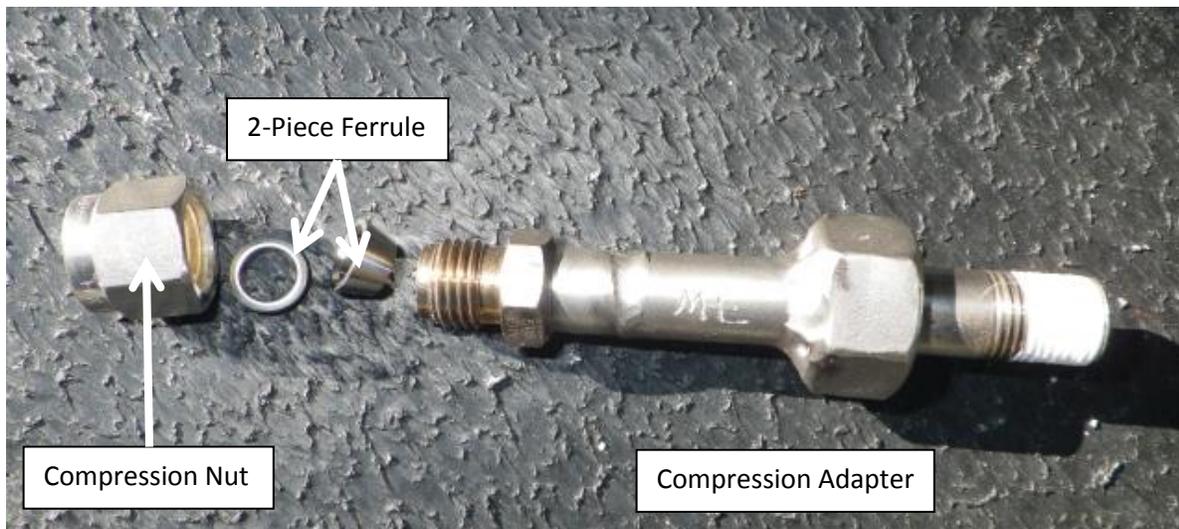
Exploded view of 1/8" NPT->1/4" compression adapter.
